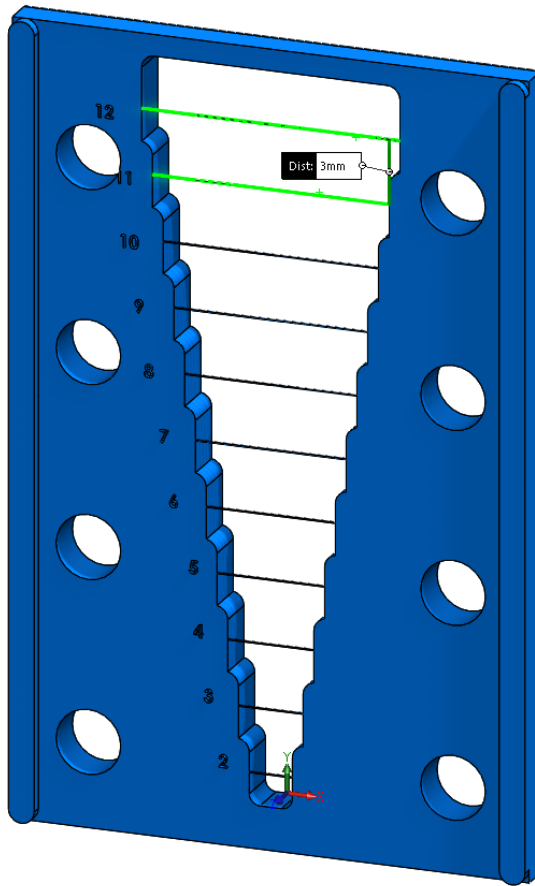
Large V-Type test specimen with 3mm beam spacing and maximum span of 12mm
